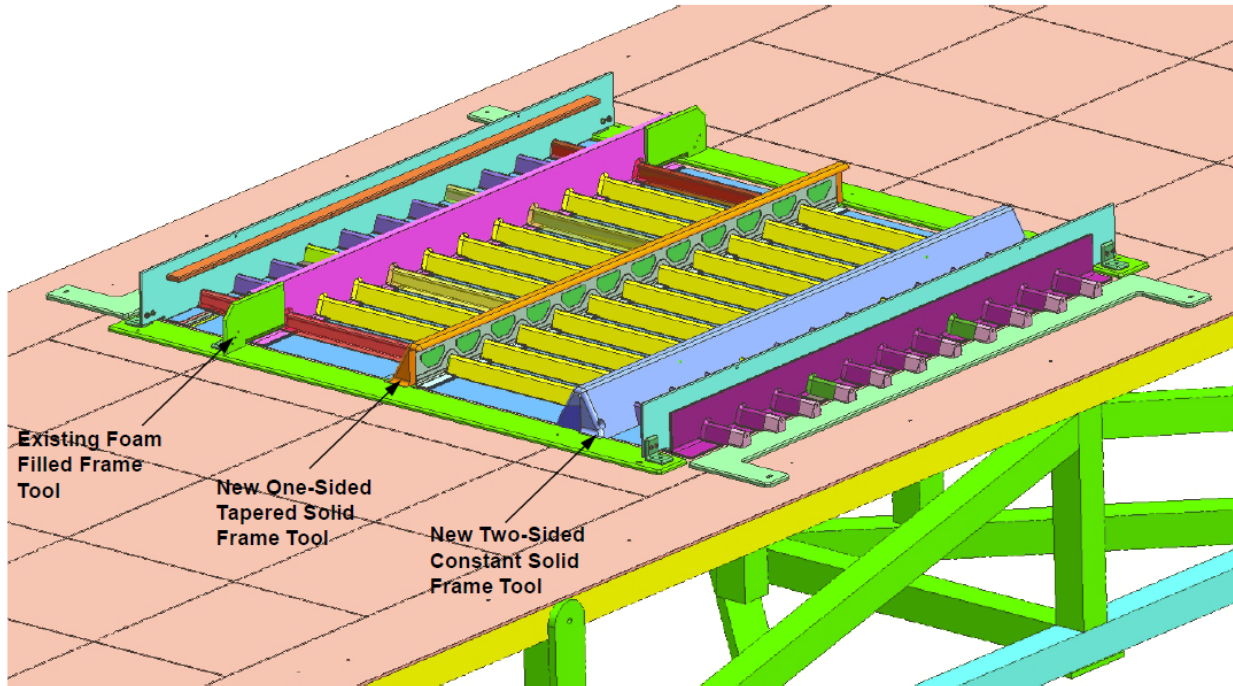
Cure Tooling for the Alternate Center Keel Panel
